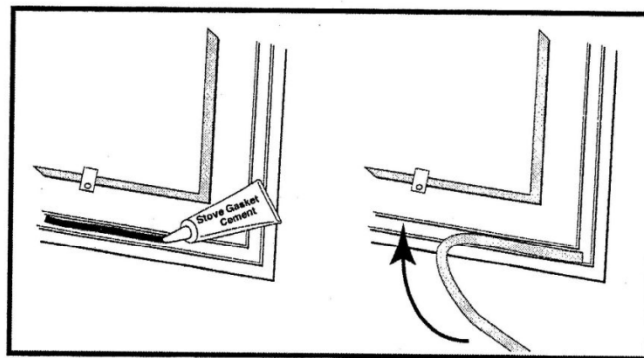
Lay a bead of gasket cement then press gasket in place.
